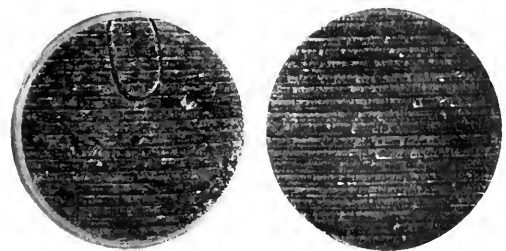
Machined Surfaces of the Button Removed from the Point Shown in Fig. 1
